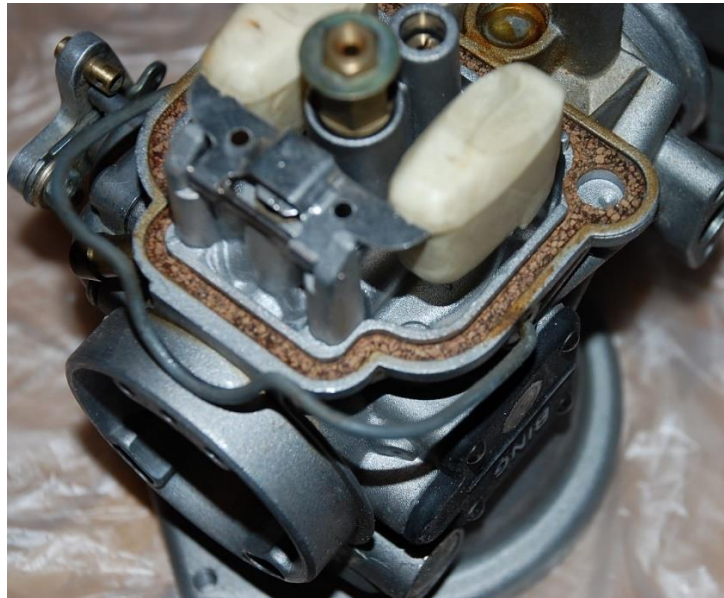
Bottom side of the carb with the fuel bowl removed to expose the cork gasket, the white fuel floats and the main jet assembly (hex nut with greenish washer at top centre).
